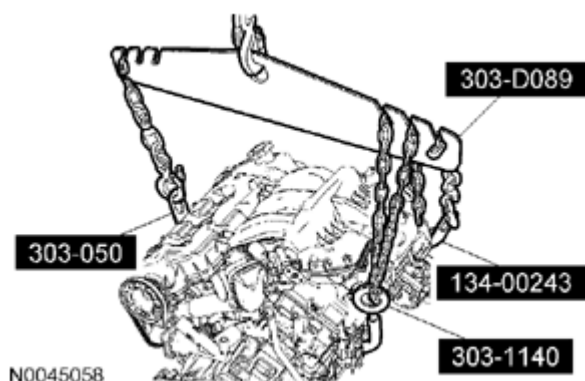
Removing Engine And Transaxle From Lift Table Using Special Tools
